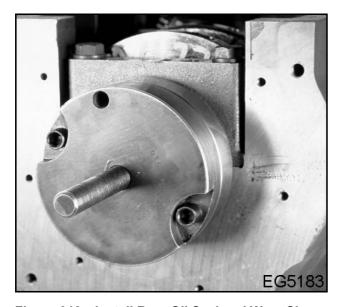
Install Rear Oil Seal and Wear Sleeve Installer
